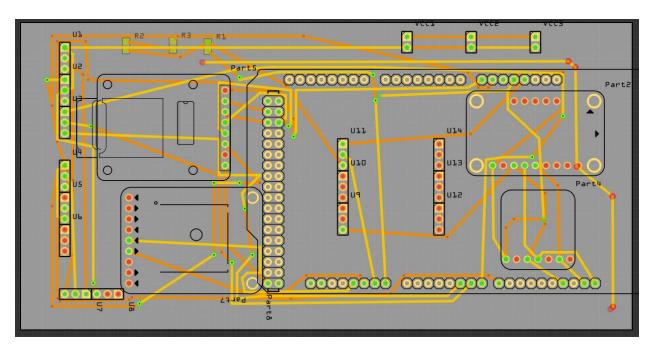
Layout of custom PCB for Whoosh Generator 7 rocket
